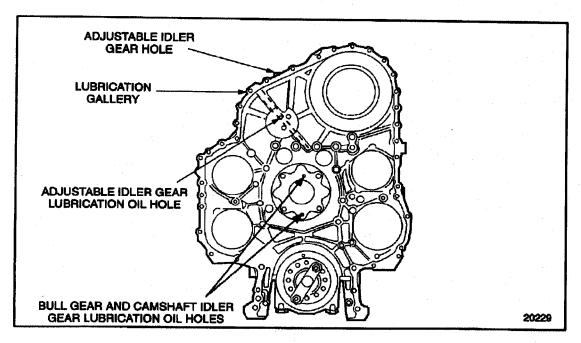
Bull Gear and Camshaft Idler Gear Lubricating Oil Hole Locations
